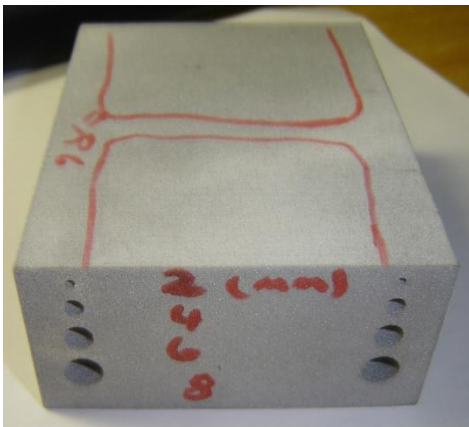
Alumide<sup>®</sup> test sample for U-shaped channels
